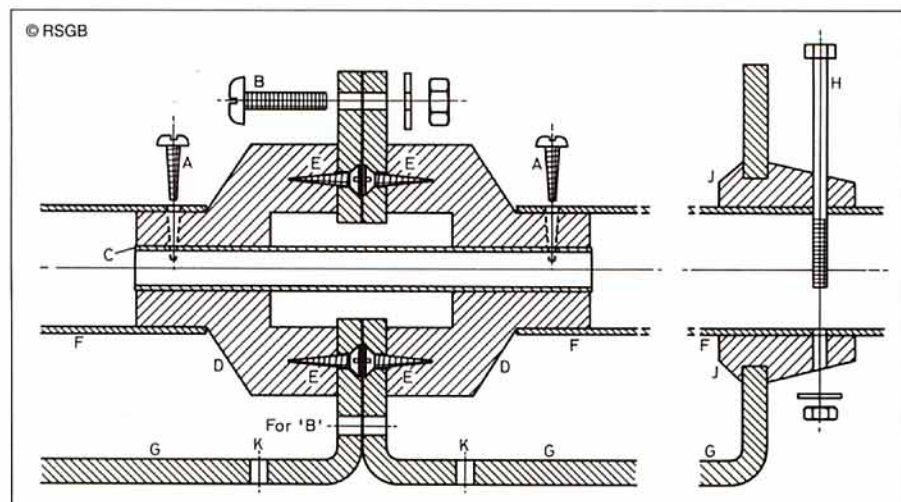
Cross-section through element (entire assemblies): A - S/T screw fastens element to insulator D and tube C. (Not used if split driven element. Hose clips instead); B - Plated bolt (with washer and nut) fasten mast brackets together (3 off); C - Thick wall tube reinforces insulator and provides electrical connection between elements F, via bolts A; D - Lower insulators; E - C/S screws fastening Ds to brackets G; F - CB antenna elements; G - Mast mounting brackets; H - Bolt, locks element to J to prevent element sliding in J; J - Top insulator and K - Holes for boom brackets (2" car exhaust clamps).
